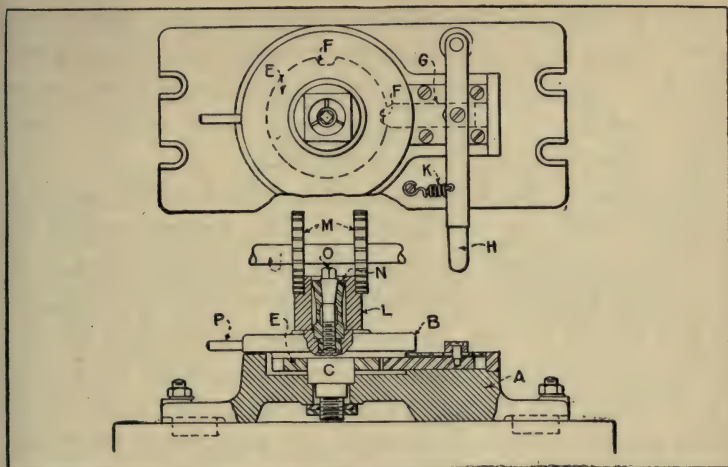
SIMPLE INDEX-MILLING FIXTURE
